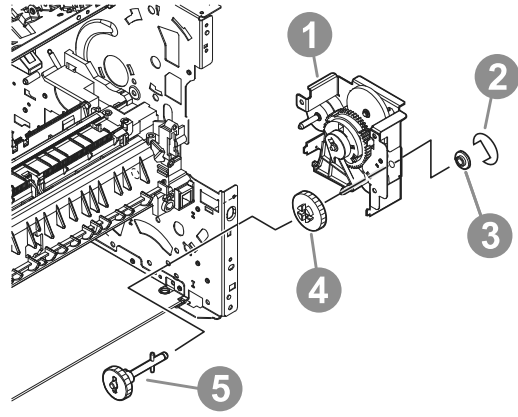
Remove the pickup-drive assembly (8 of 8)
